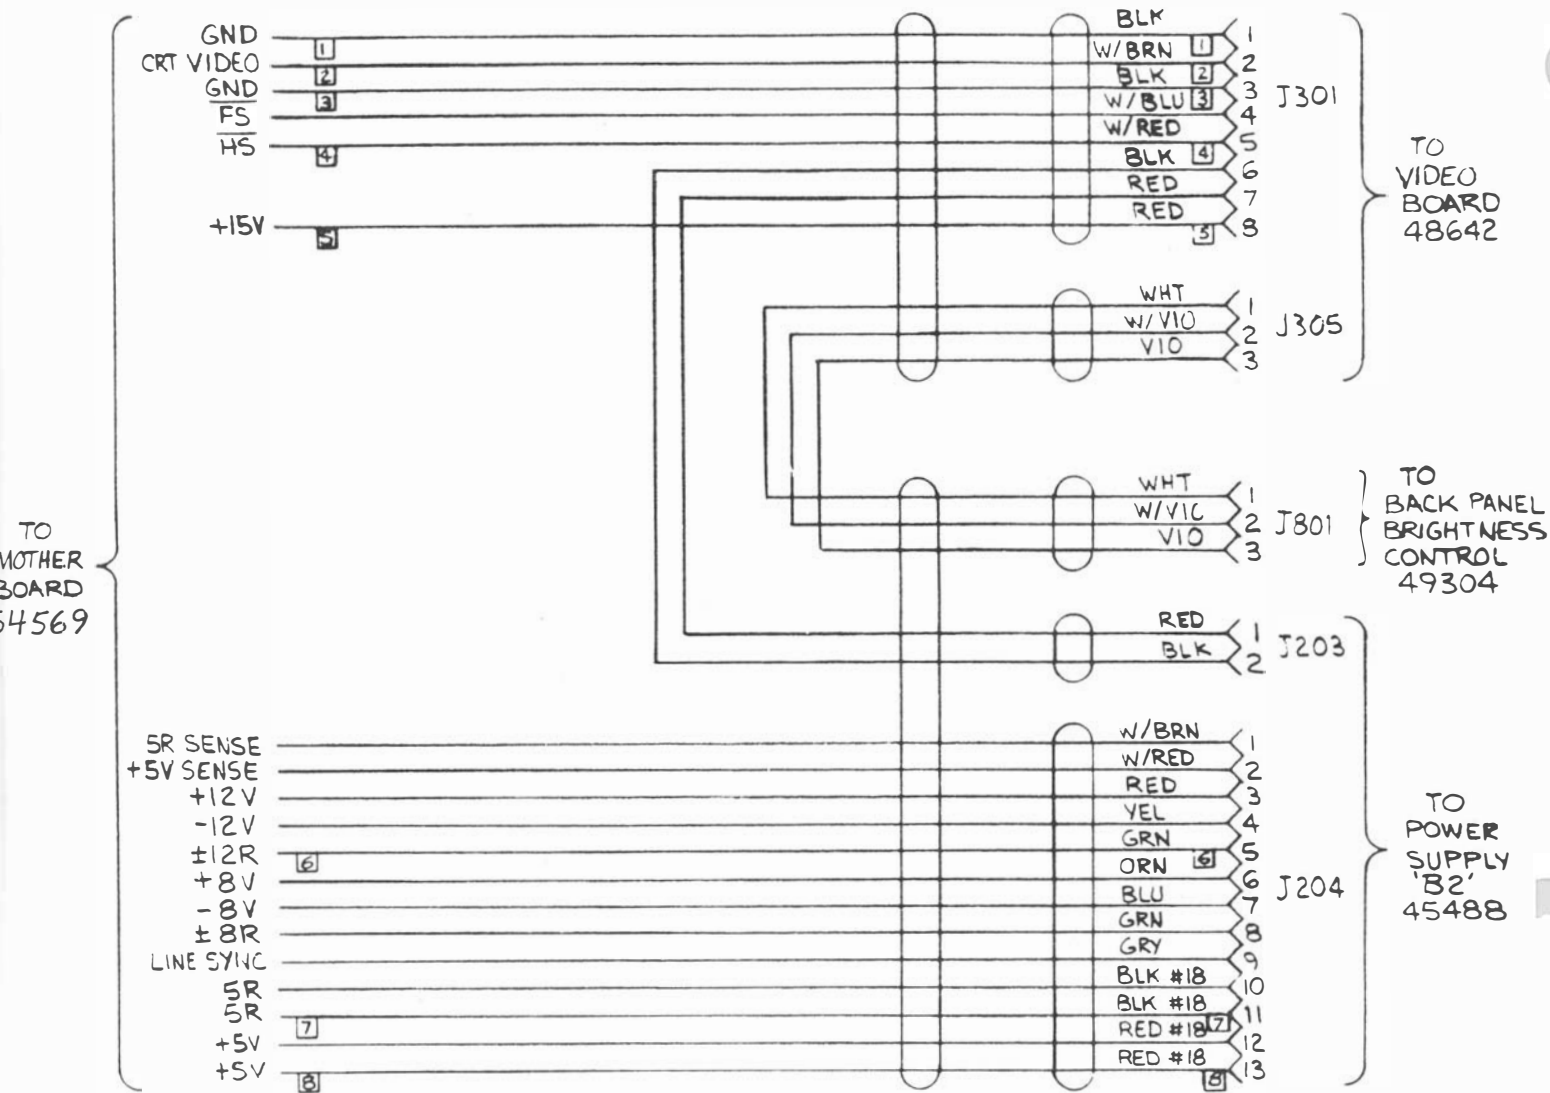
Motherboard Cable Assembly (Part No. 49302)
